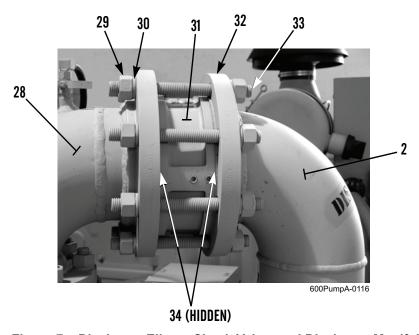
Discharge Elbow, Check Valve, and Discharge Manifold.
